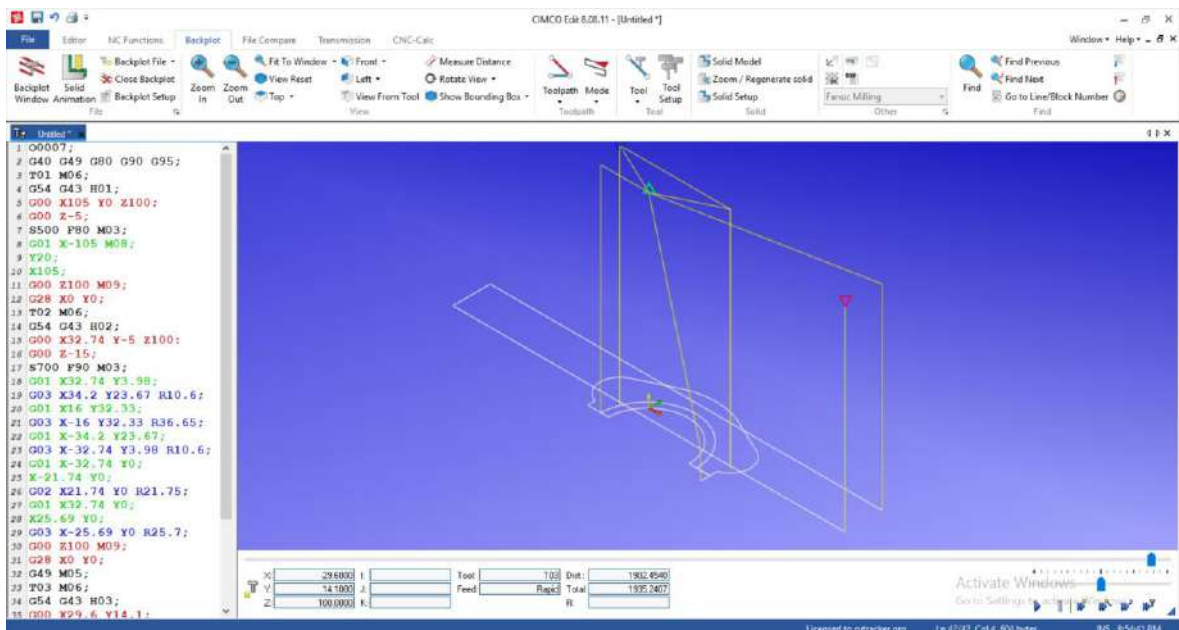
Processing codes for a CNC machine written in the CIMKO program
